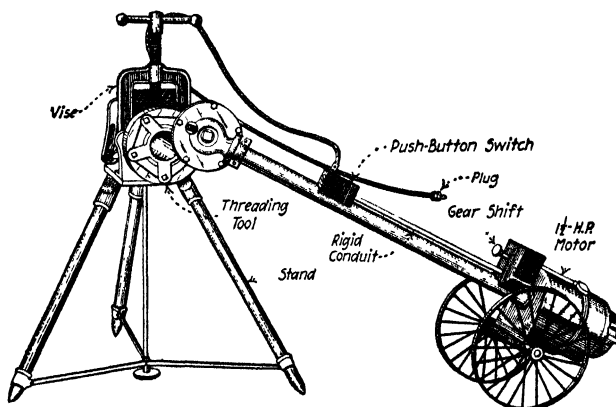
Power drive for pipe threading tools. The vice may be permanently mounted on any strong bench, instead of on the portable stand which is shown. (Toledo Pipe Threading Machine Co., Toledo, Ohio.)
